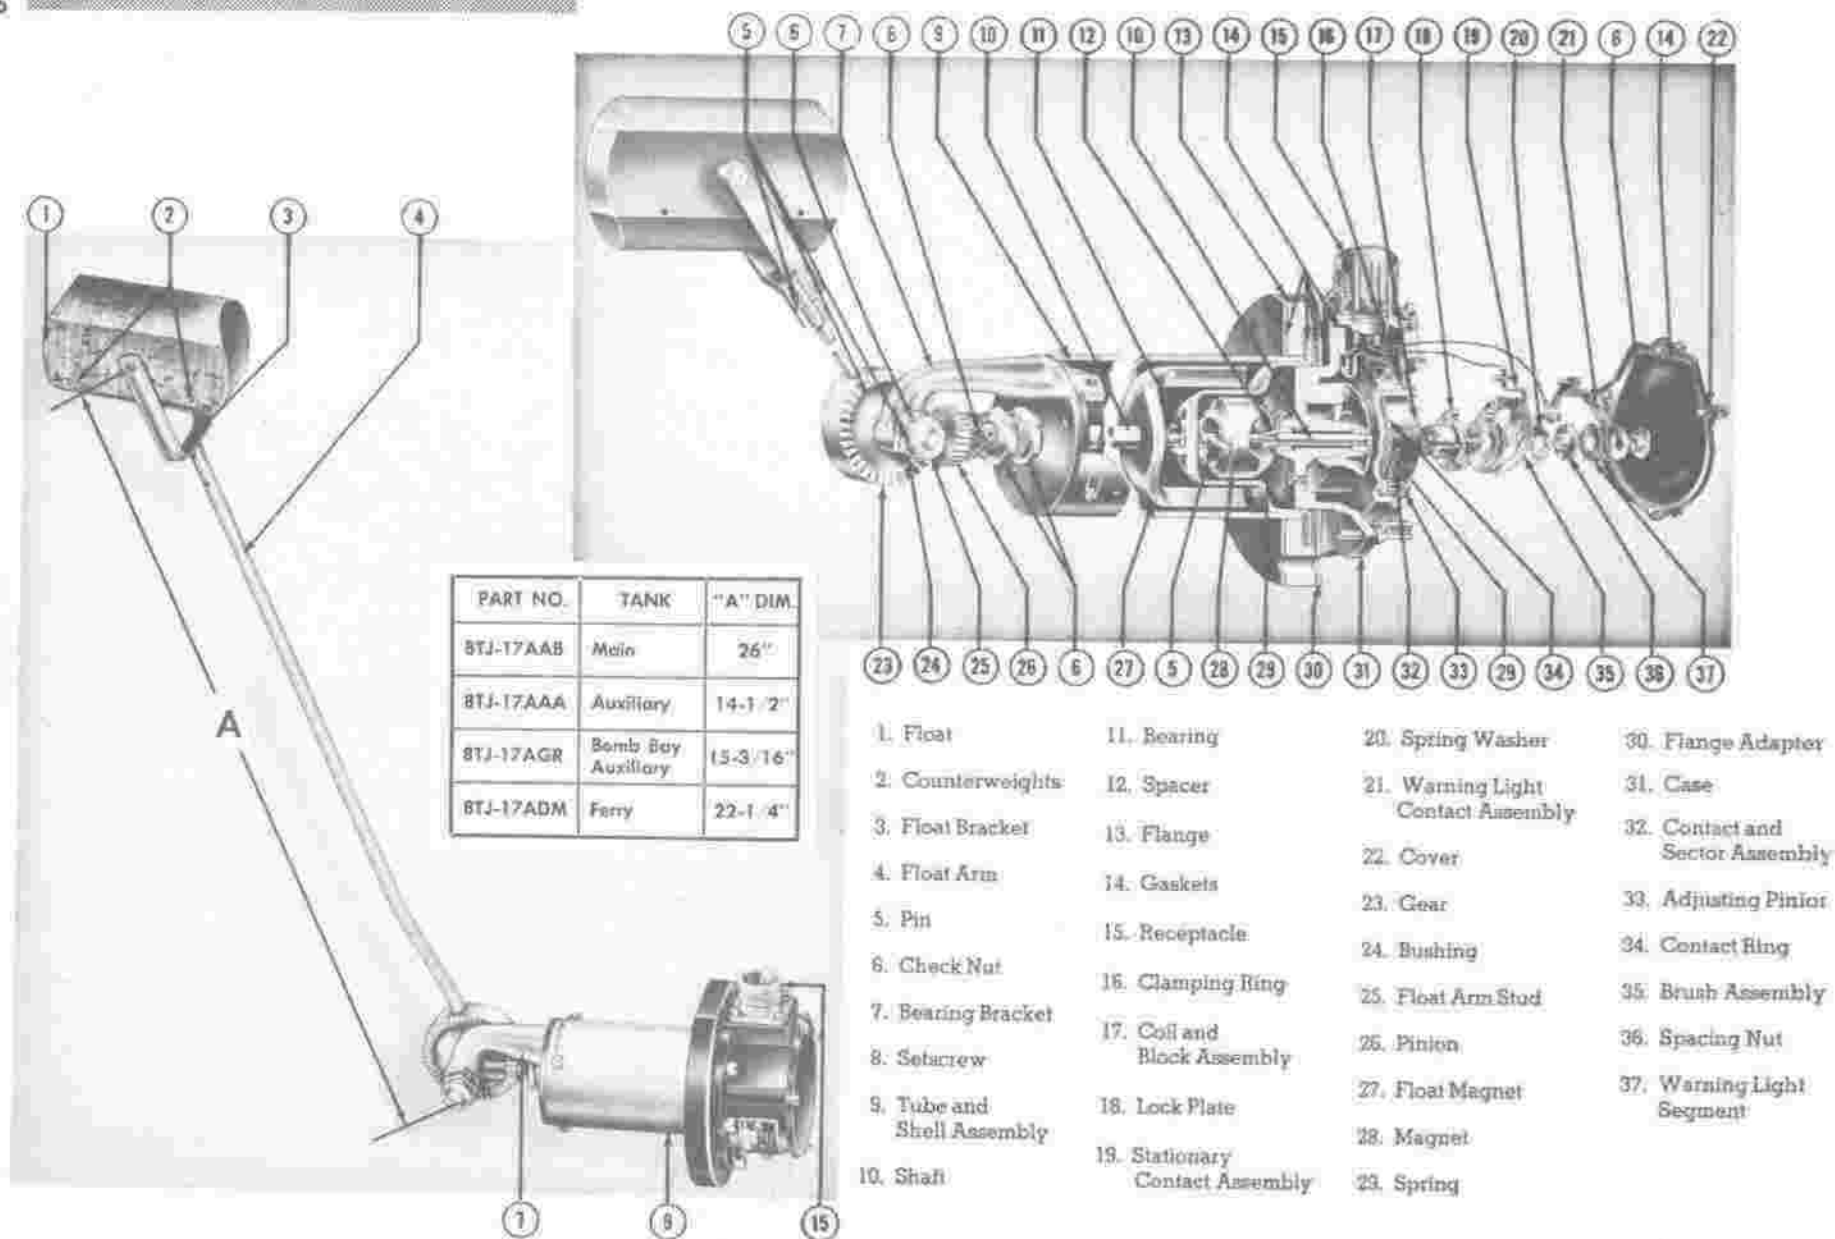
Fuel Level Gage Transmitter - Type TJ-17
